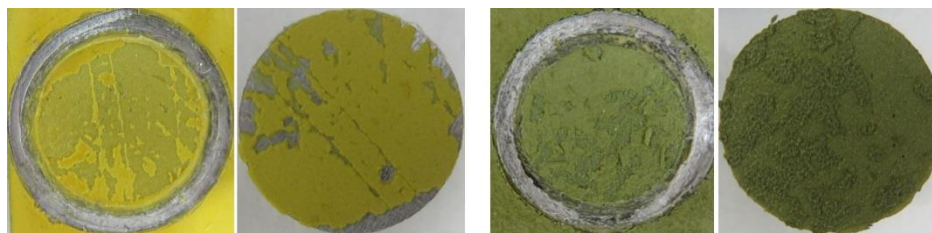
Fracture surface of the coatings after pull-off adhesion test: TSA+C coated sample and dolly (left), and TSA/PEO+CM coated sample and dolly (right)
